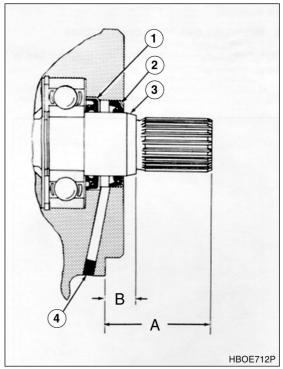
DOUBLE SHAFT SEAL ARRANGEMENT
